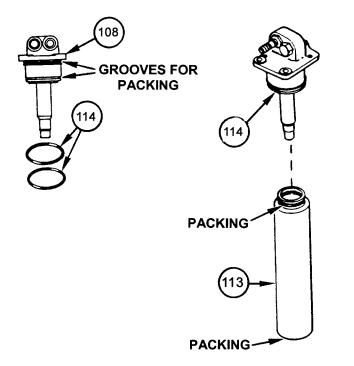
Oil Filter Head Assembly and Oil Filter Element.
